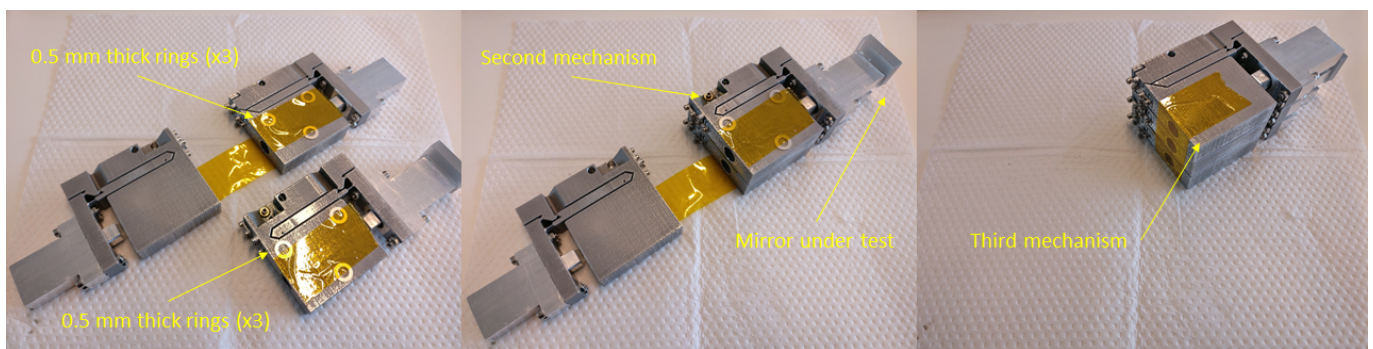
Assembling three mechanisms at the correct distance using 0.5 mm thick rings.
